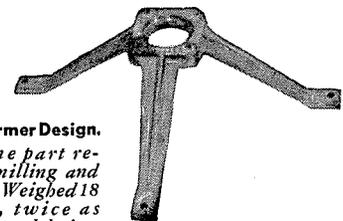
Former Design. Machine part required milling and drilling. Weighed 18 pounds, twice as much as steel design.
